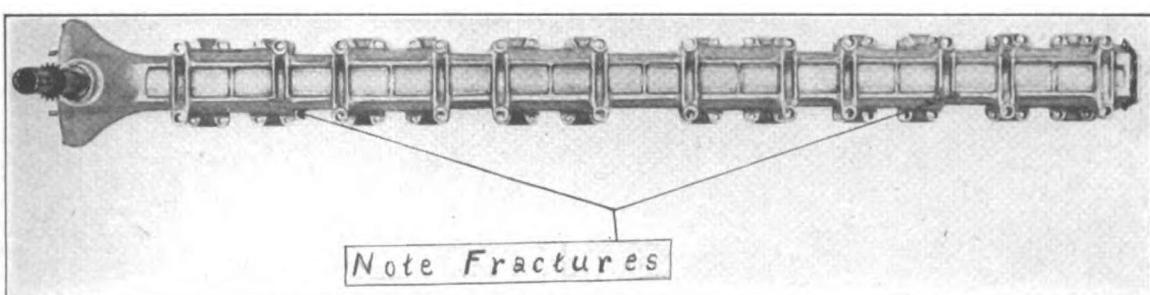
Camshaft housing showing typical fractures after endurance run. (Left bank.)
